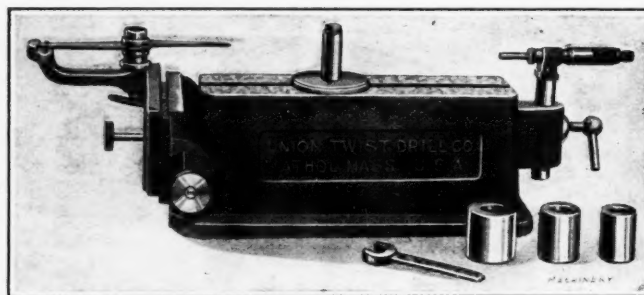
Similar Device to that shown in Fig. 46, for testing Under-cut on Teeth of Milling Cutters and Hobs
